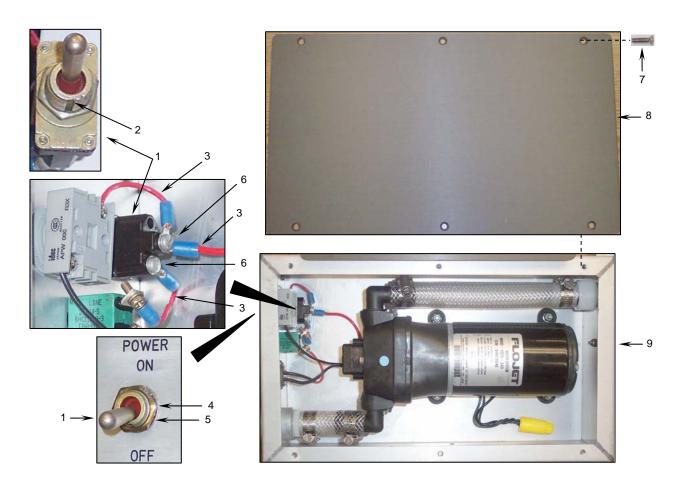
Installing the Sink Fill Pump Assembly Power Switch.
